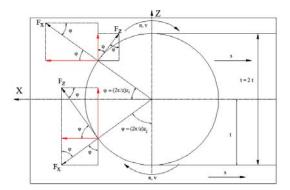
Cutting force's components in conventional symmetrical full face milling.
